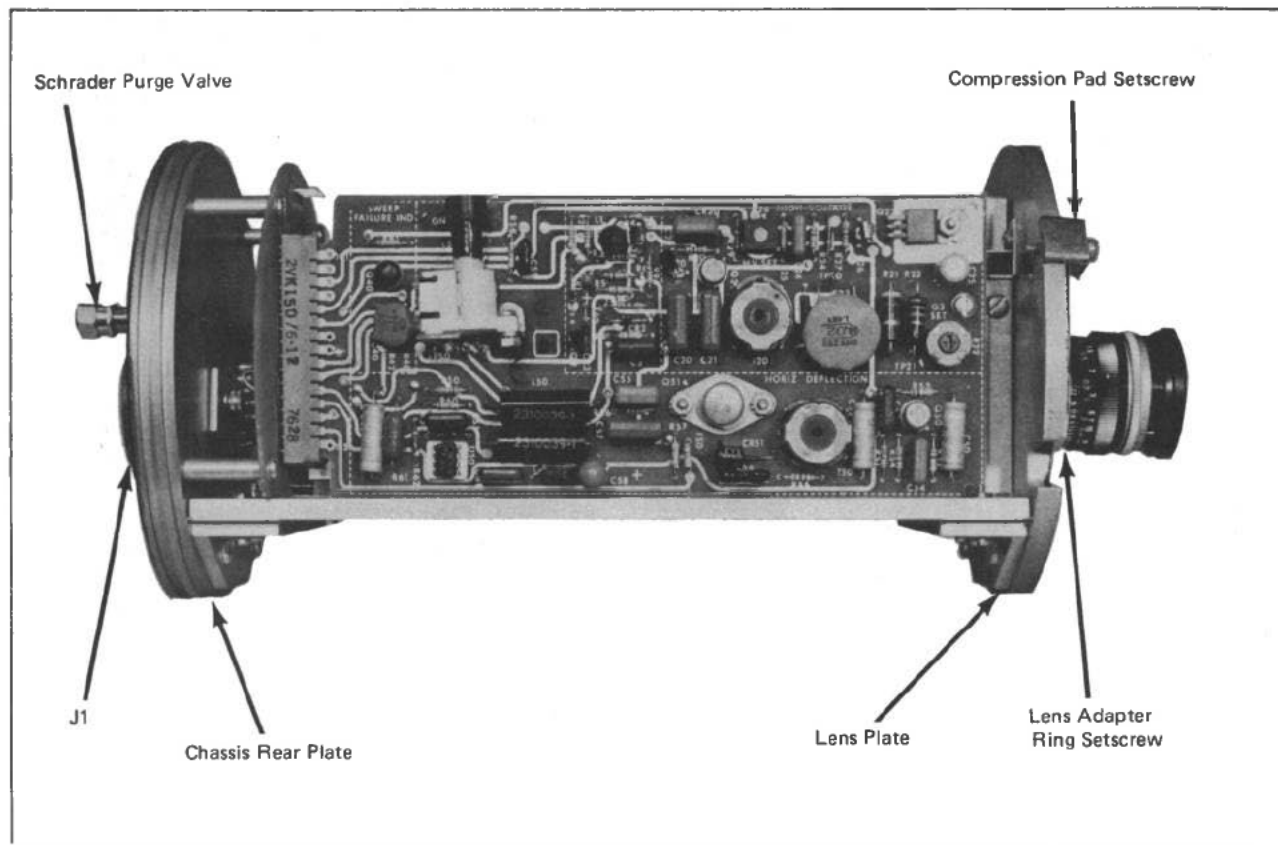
Interior View of Camera Showing Compression Pad Setscrew.
